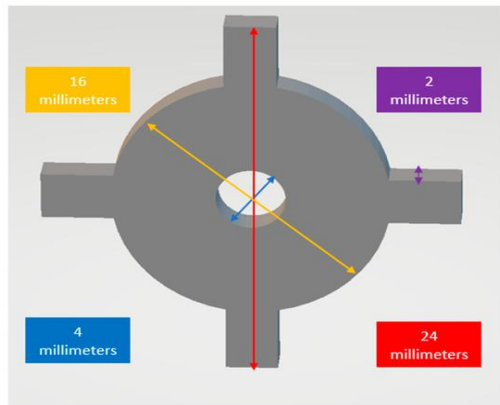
Final digital design of the calibration coupon illustrating its overall dimensions.
